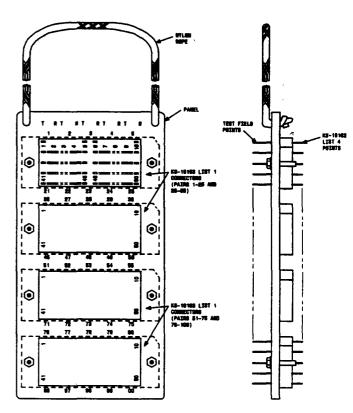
Pick Test Panel—Used With T and U Test Connectors and 299A and 299B Test Adapters—For 307-, 309-, 310-, 310M-, or 311-Type Connectors
